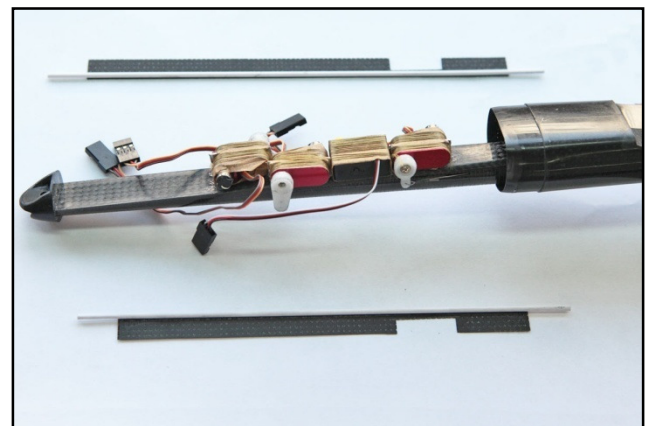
Flaperon housing tubes with reinforcing plates
